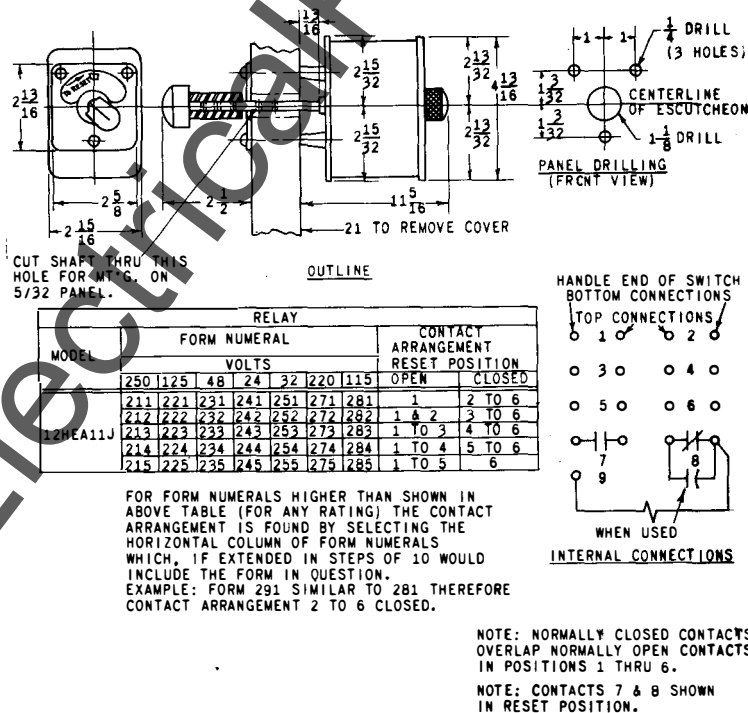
Outline, Panel Drilling And Internal Connections For Type HEA11J Relay
